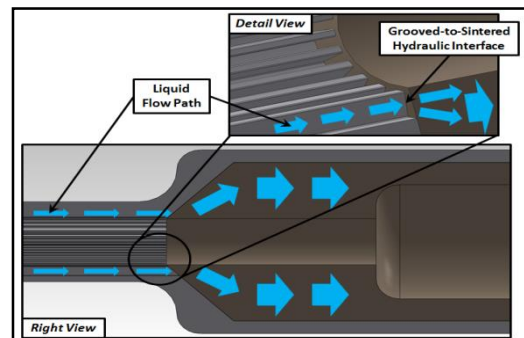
Planetary CCHP evaporator 45° conical interface between the sintered wick in the evaporator and the grooves in the adiabatic section (cross sectional right view and detail view).
